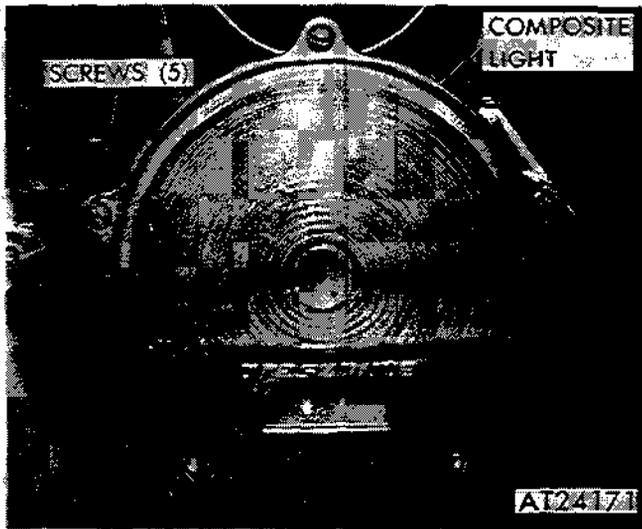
Removing or installing door to front light housing on M151A2, M825, and M718A1 vehicles.
